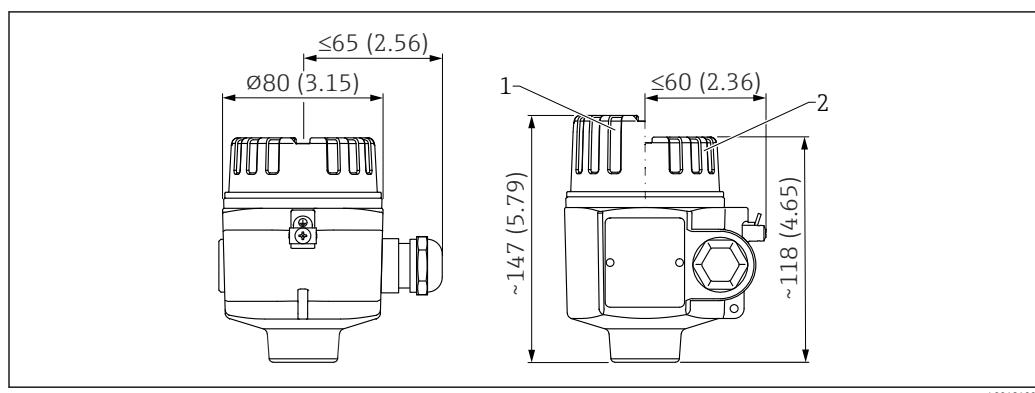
Dimensions of 316L housing, with adapter screwed onto sensor. Unit of measurement mm (in)
